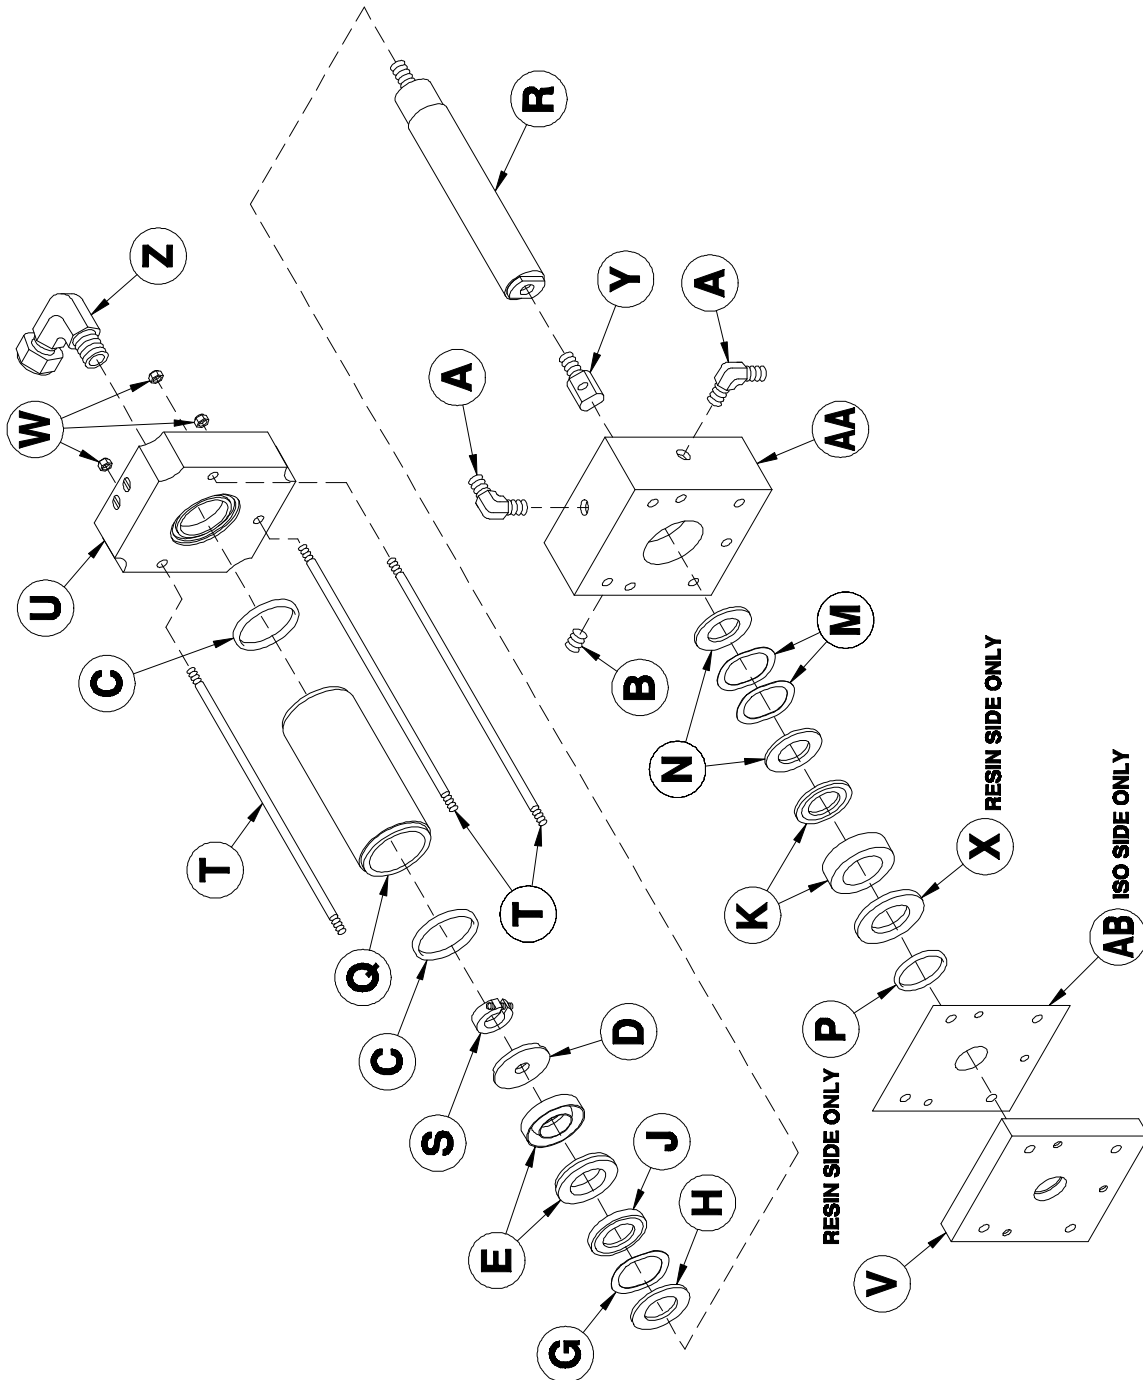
Proportioning Pump Assembly (Part No. 15400-SIZE, 15450-SIZE) Exploded View
